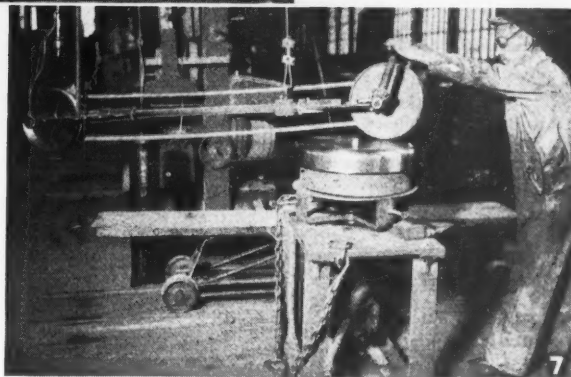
Using a cold saw to slot the end of a side rod. The operation is completed in one hour. Fig. 7—Polishing a valve chamber head casing. The casing is revolved by an air motor while being polished.
